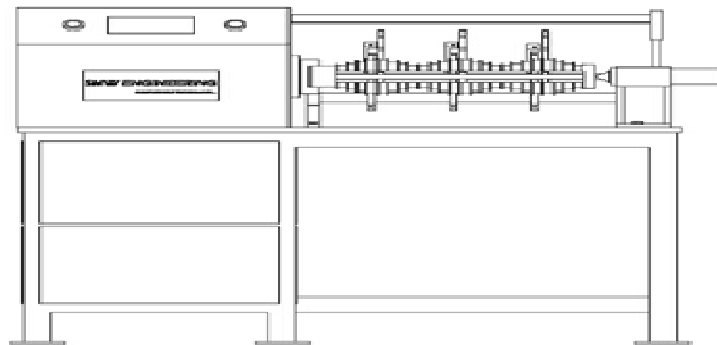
Auto CAD Design of the Automated Coil Winding Machine
